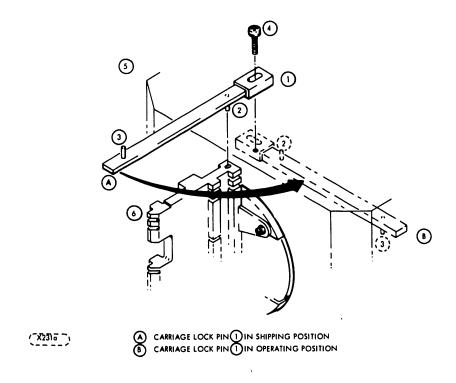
CARRIAGE LOCKING TOOL - SHIPPING POSITION
